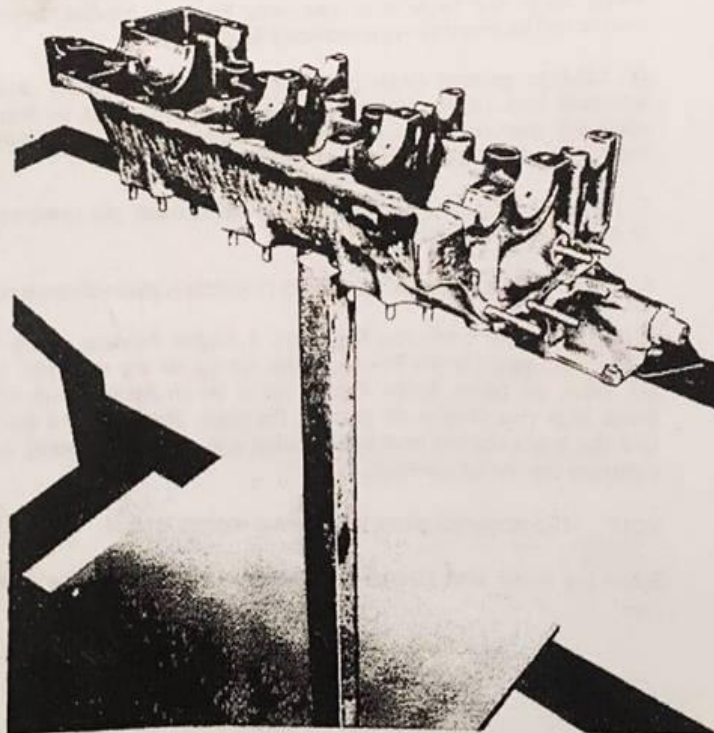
A. LEFT CRANKCASE AND SUPPORT.
